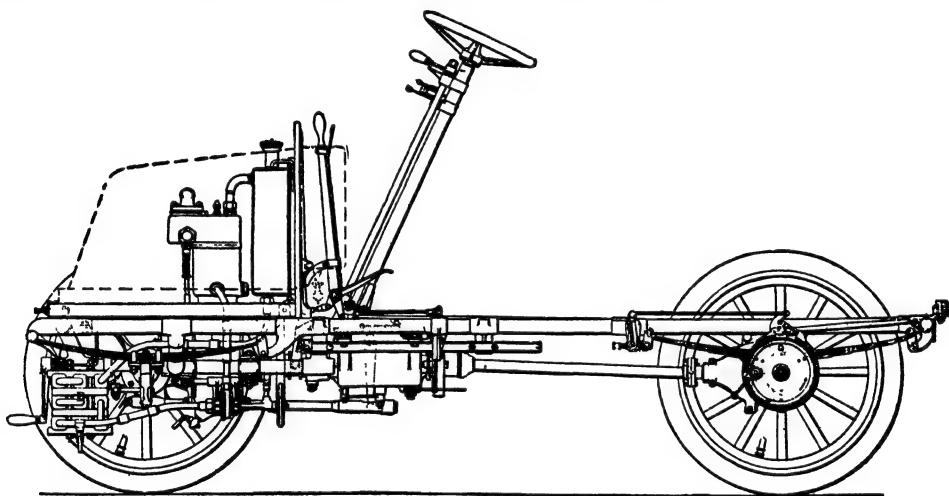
SIDE ELEVATION OF AUTOMOBILE CHASSIS.
